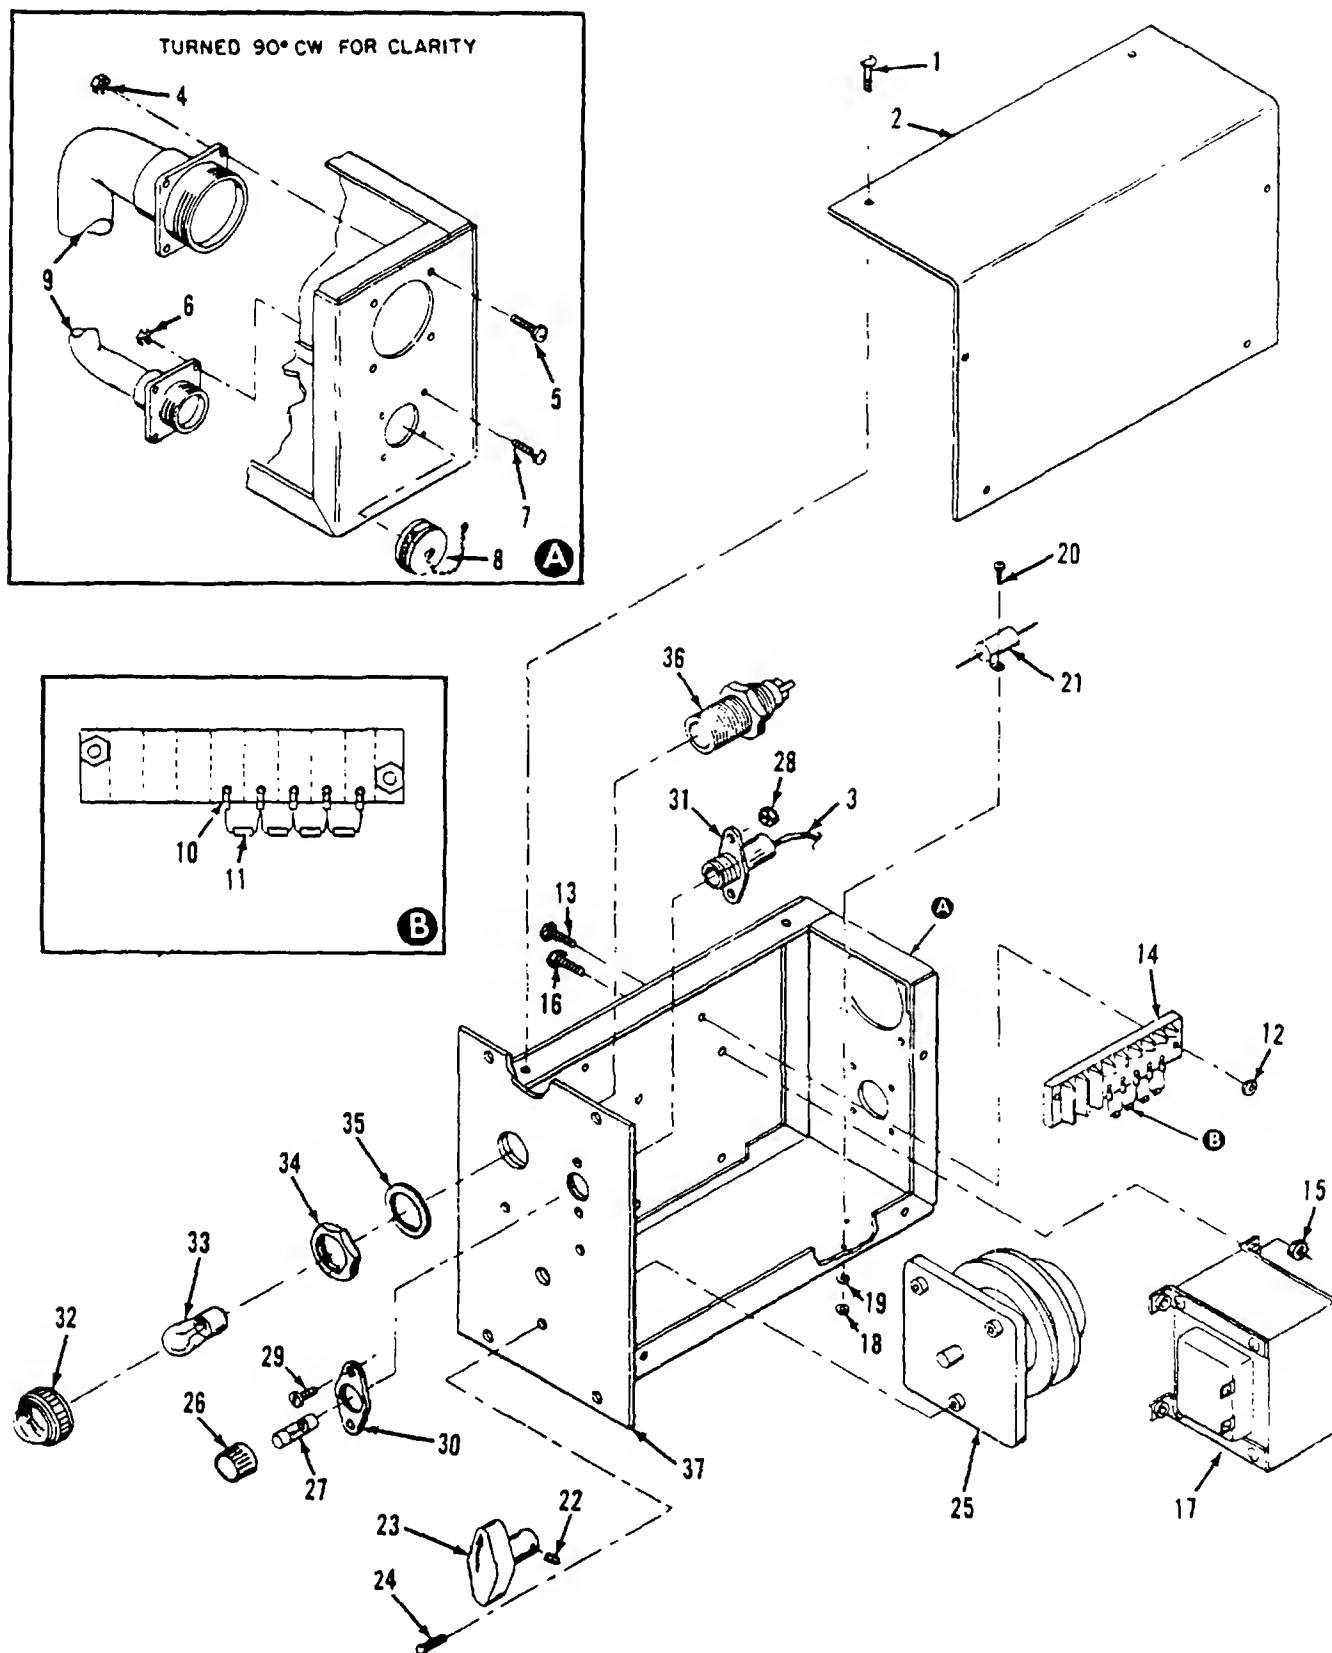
Electric Winterization Kit Control Box, Exploded View (Sheet 1 of 2)
